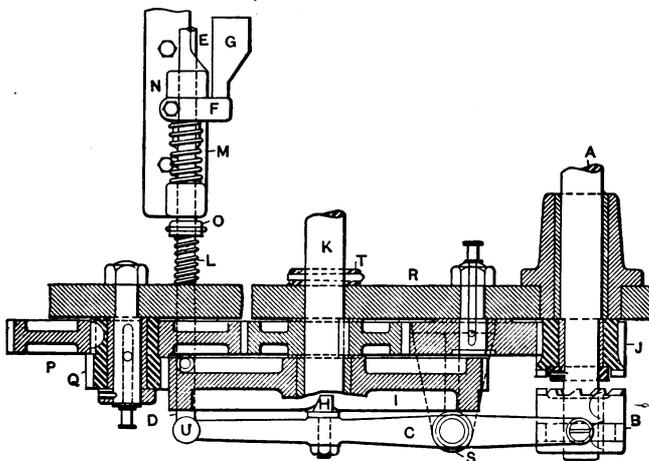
Turret Lathe Indexing Mechanism to be assembled
